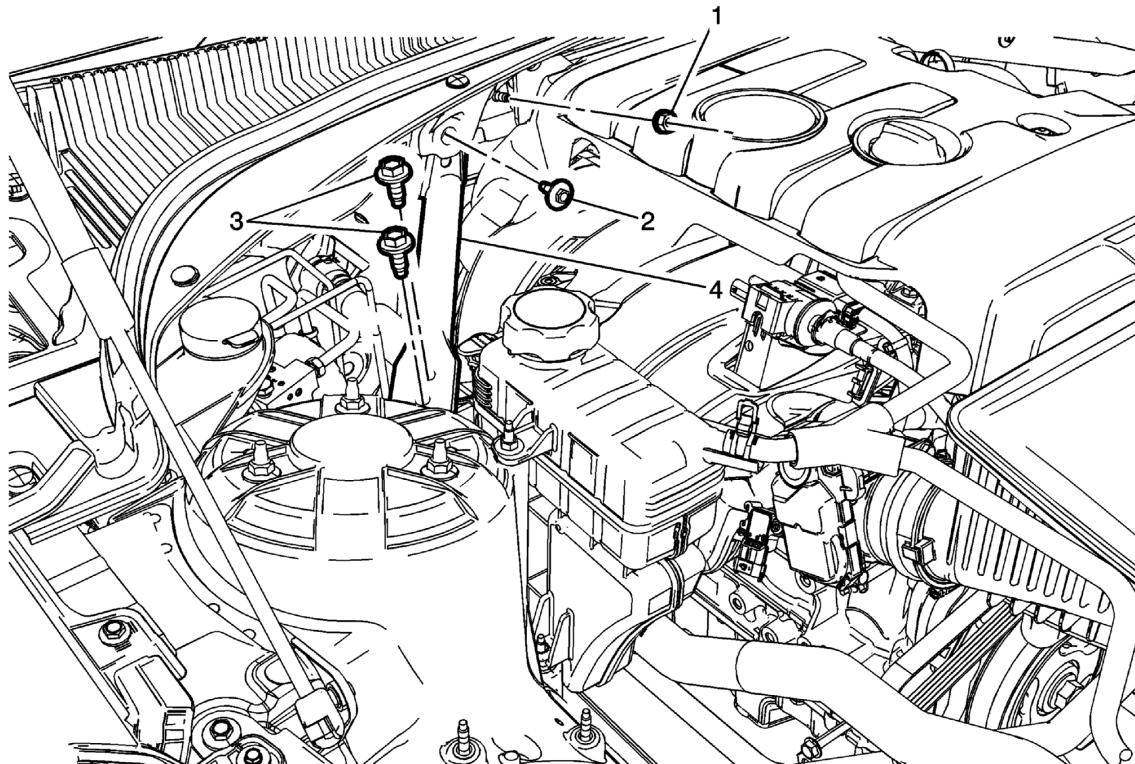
Front End Sheet Metal Diagonal Brace - Right Side
